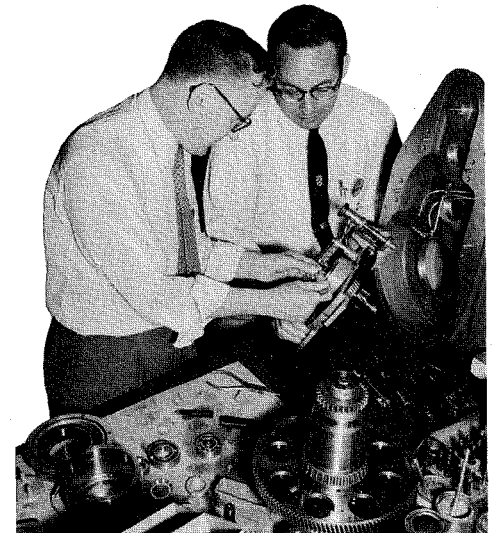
Mechanical engineer, Bob Schietinger, (l) of Missile and Radar engineering, checks an assembly tolerance in a unit of a radar precision pedestal with M. H. Betchen, general foreman. Note variety of precision drive gears, bearings, oil lines, and machined castings employed in this design.
